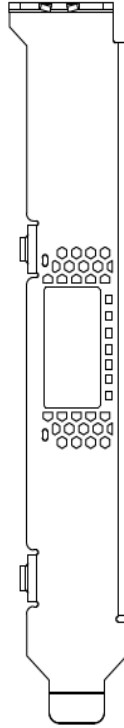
Mechanical Drawing of the Dual-port x16 Adapter Card
